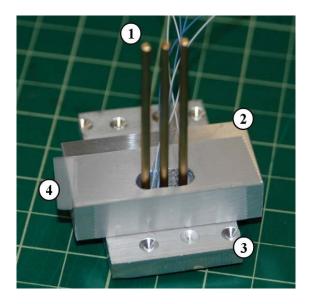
Heater block assembly jig before pouring epoxy: 1) Heater pin, 2) Heater block, 3) Pin alignment jig, 4) Scotch tape used as epoxy release
